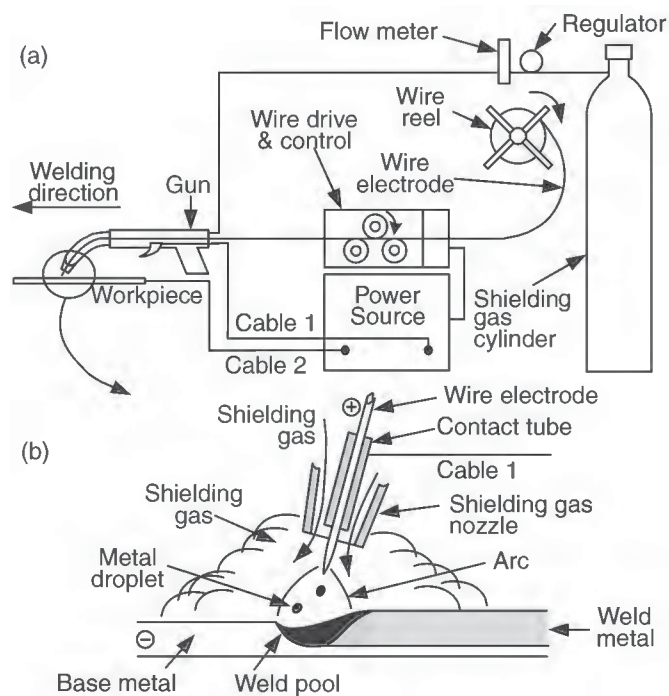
Gas-metal arc welding (a) overall process and (b) welding area [36]
